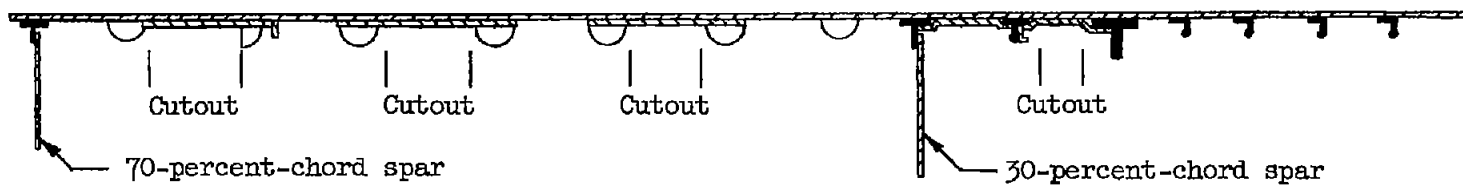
Details of riveted shear joint at span station 120 in which type III failures occurred.
